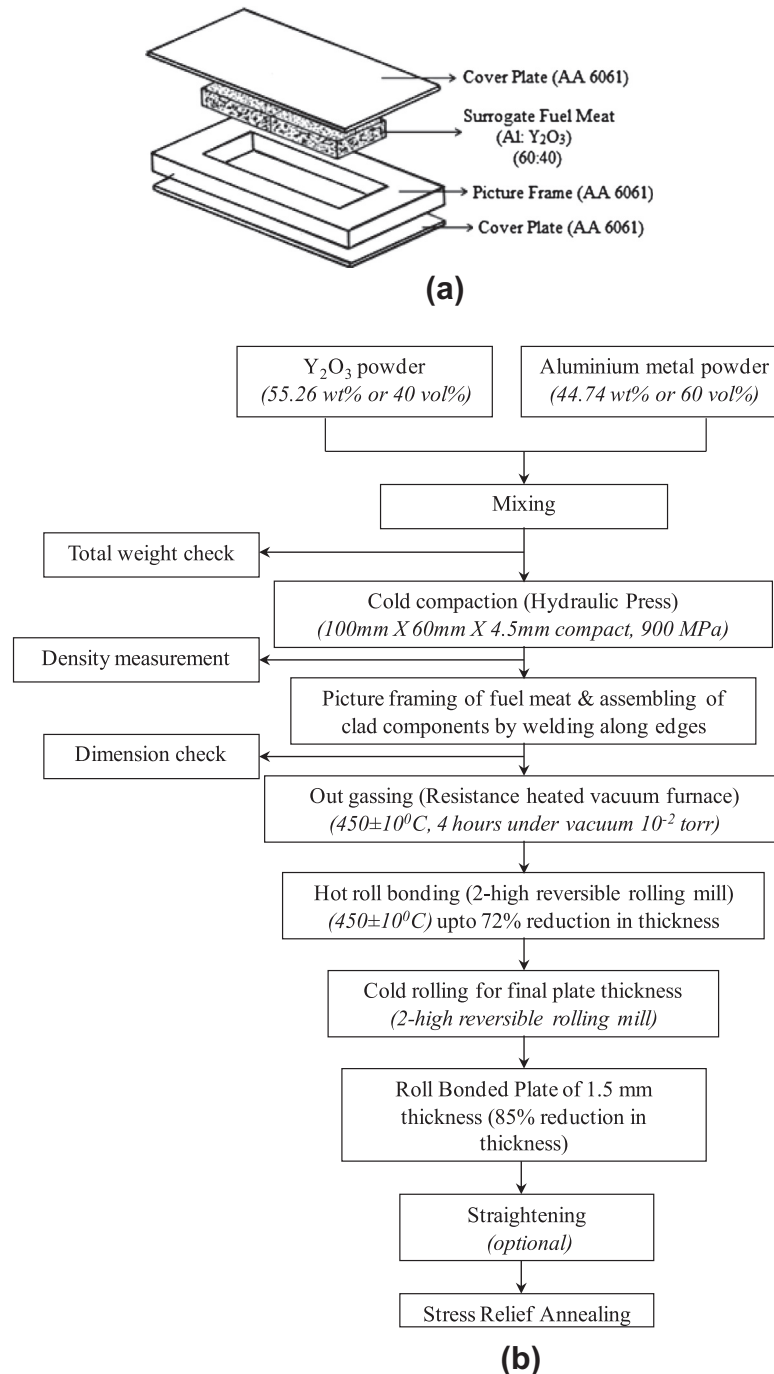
(a) Schematic showing typical picture-frame assembly. This included aluminum (AA6061) cladding (cover plate and picture frame) and surrogate fuel meat. The latter consisted of 60:40 (by volume) aluminum and yttria (Y_2O_3) cold compacted powder. (b) Process flow sheet for simulated plate fuel fabrication. In the actual plate fuel fabrication, Y_2O_3 is replaced with uranium silicide (U_3Si_2). Process flow sheet is otherwise identical.
